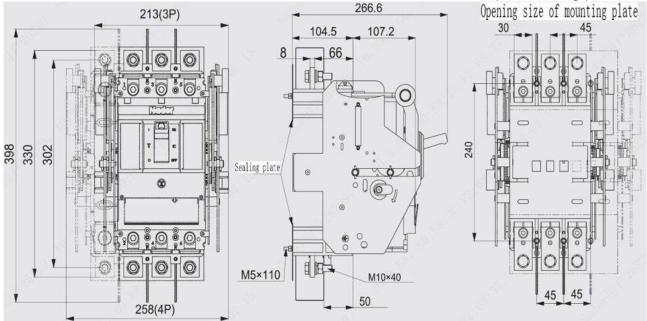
3P, 4P outline dimensions of withdrawable font panel wiring products Note: Unmarked tolerance level should follow GB/T 1804-c.
